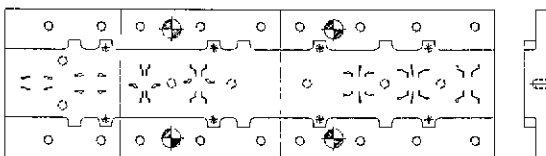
A drawing of the stripper plate of internal leads generated in the die layout module
